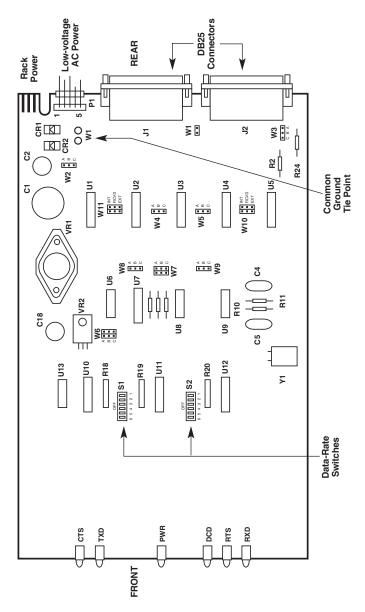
SME-530 Printed-Circuit-Board Layout.
